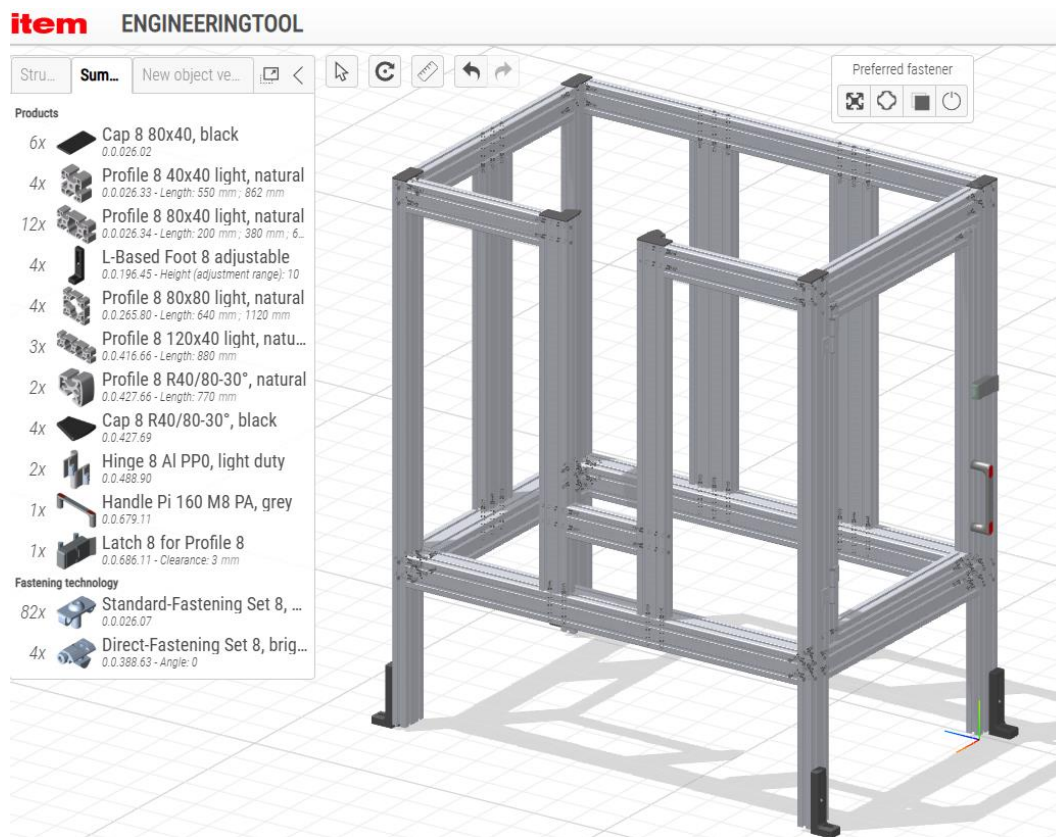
Finalised frame design and component list from Item Engineering Tool (item Industrietechnik GmbH. 2025a.).
